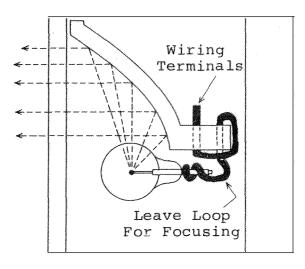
D SIDE VIEW OF LAMPHOUSING.
